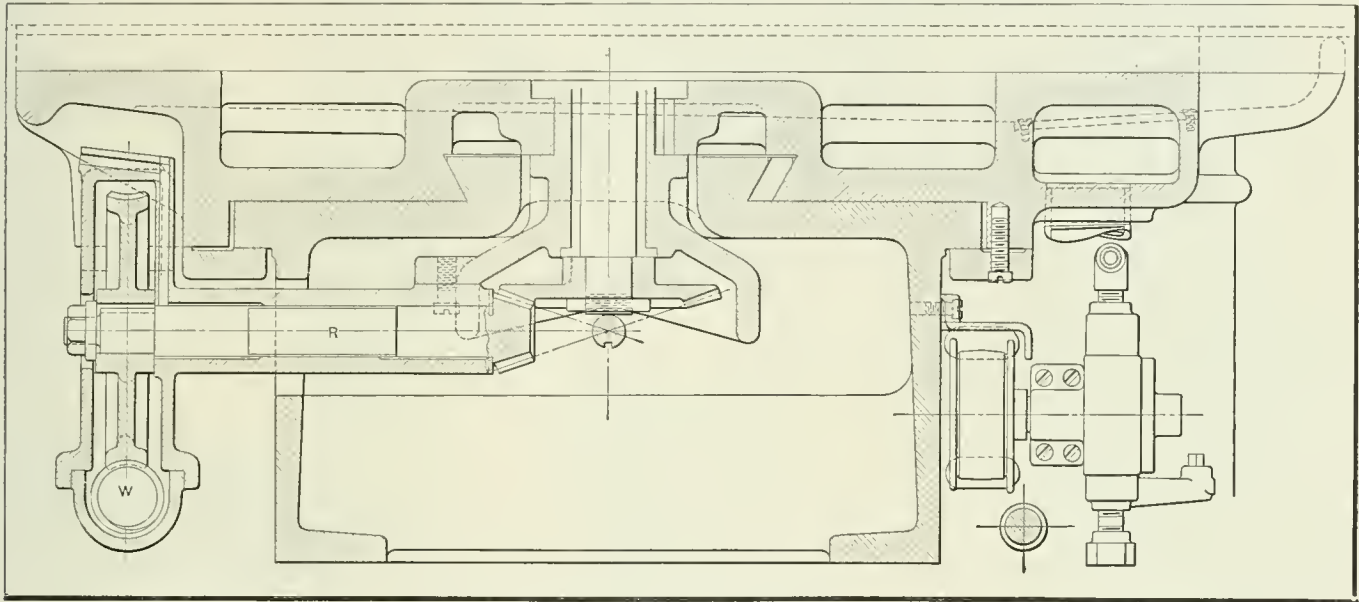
Longitudinal Section showing Table Drive and Hand Feed
